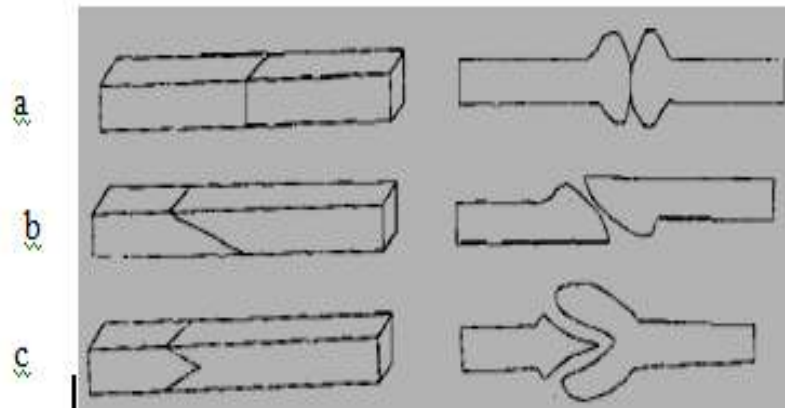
(a) Butt Weld, (b) Scarf Weld, and (c) 'V' weld or Splice Weld
